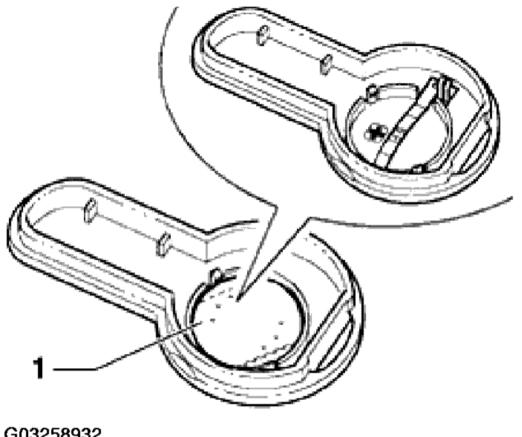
Removing Lower Battery From Bracket Courtesy of VOLKSWAGEN OF AMERICA, INC.
